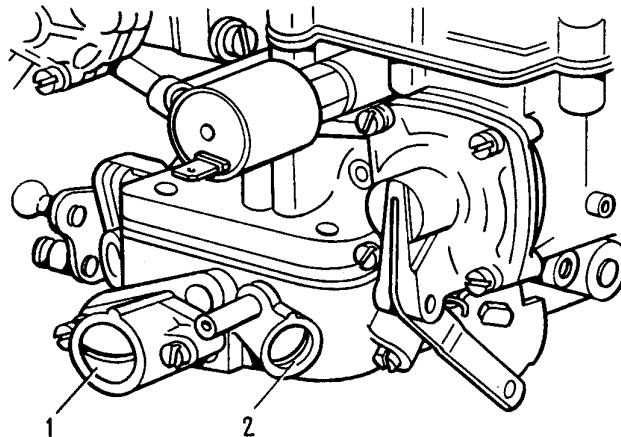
Idling System Adjusting Screws in Carburetors 2107-1107010-10 and 2107-1107010-20: 1 - idle speed adjusting screw; 2 - idle mixture adjusting screw
